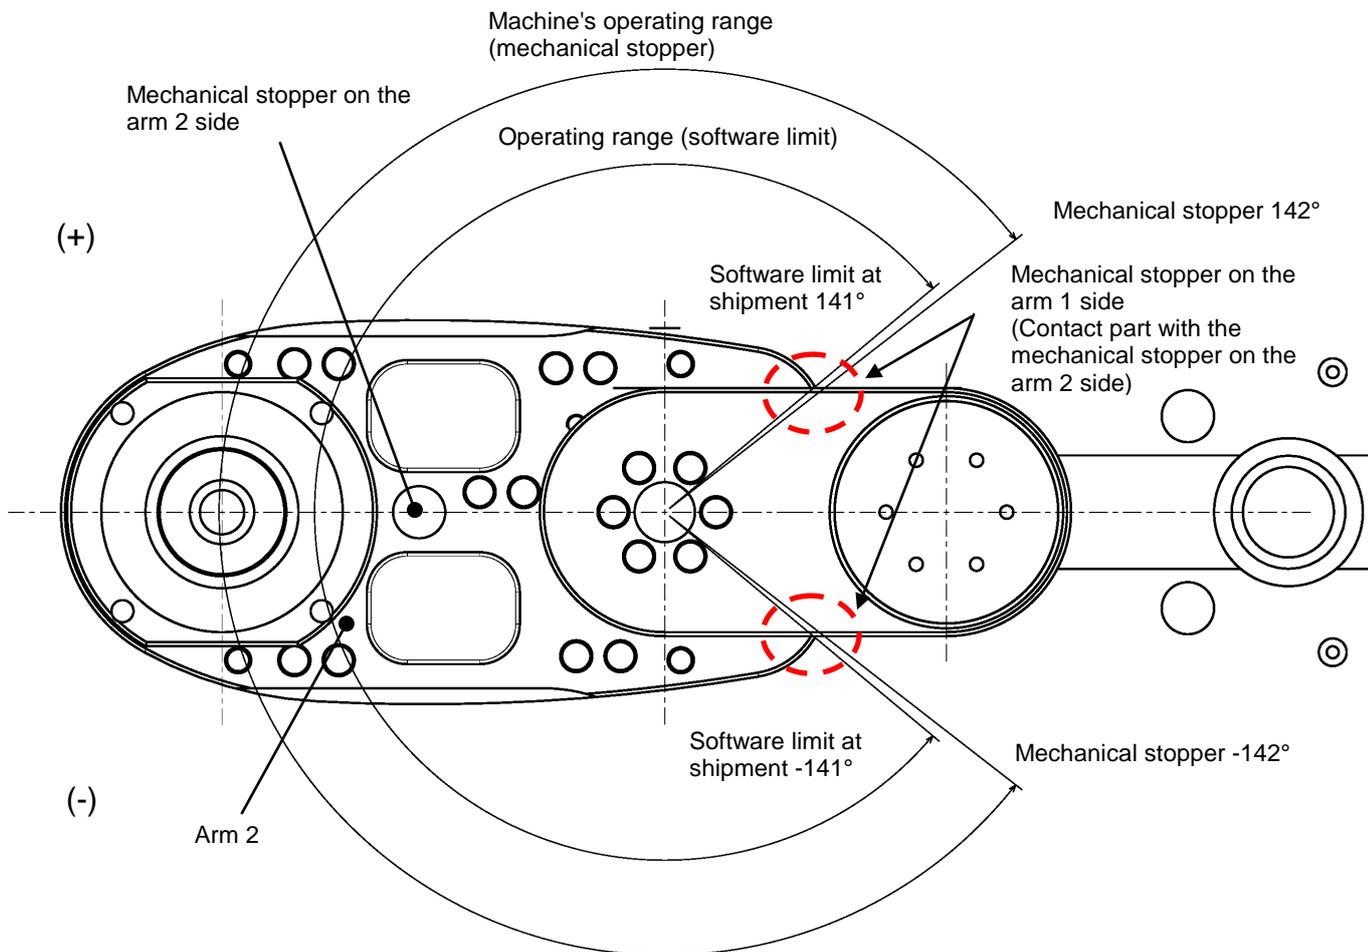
Axis 2 mechanical end settings (TH180)
